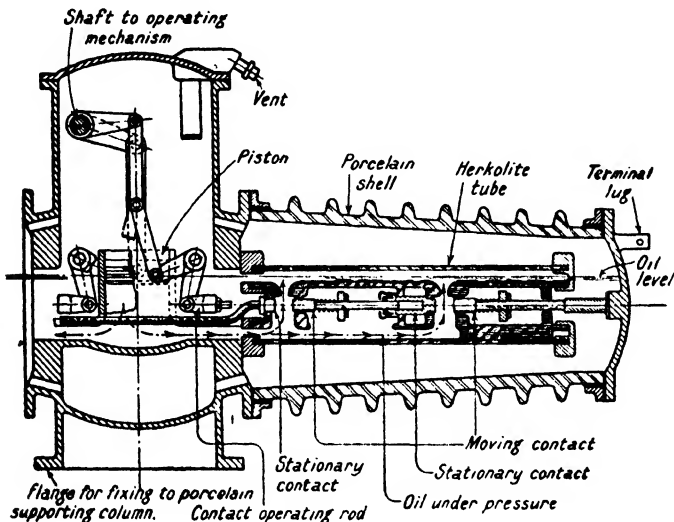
PART SECTIONAL DRAWING OF THE INTERRUPTING UNIT OF A 138 kV. IMPULSE CIRCUIT-BREAKER
